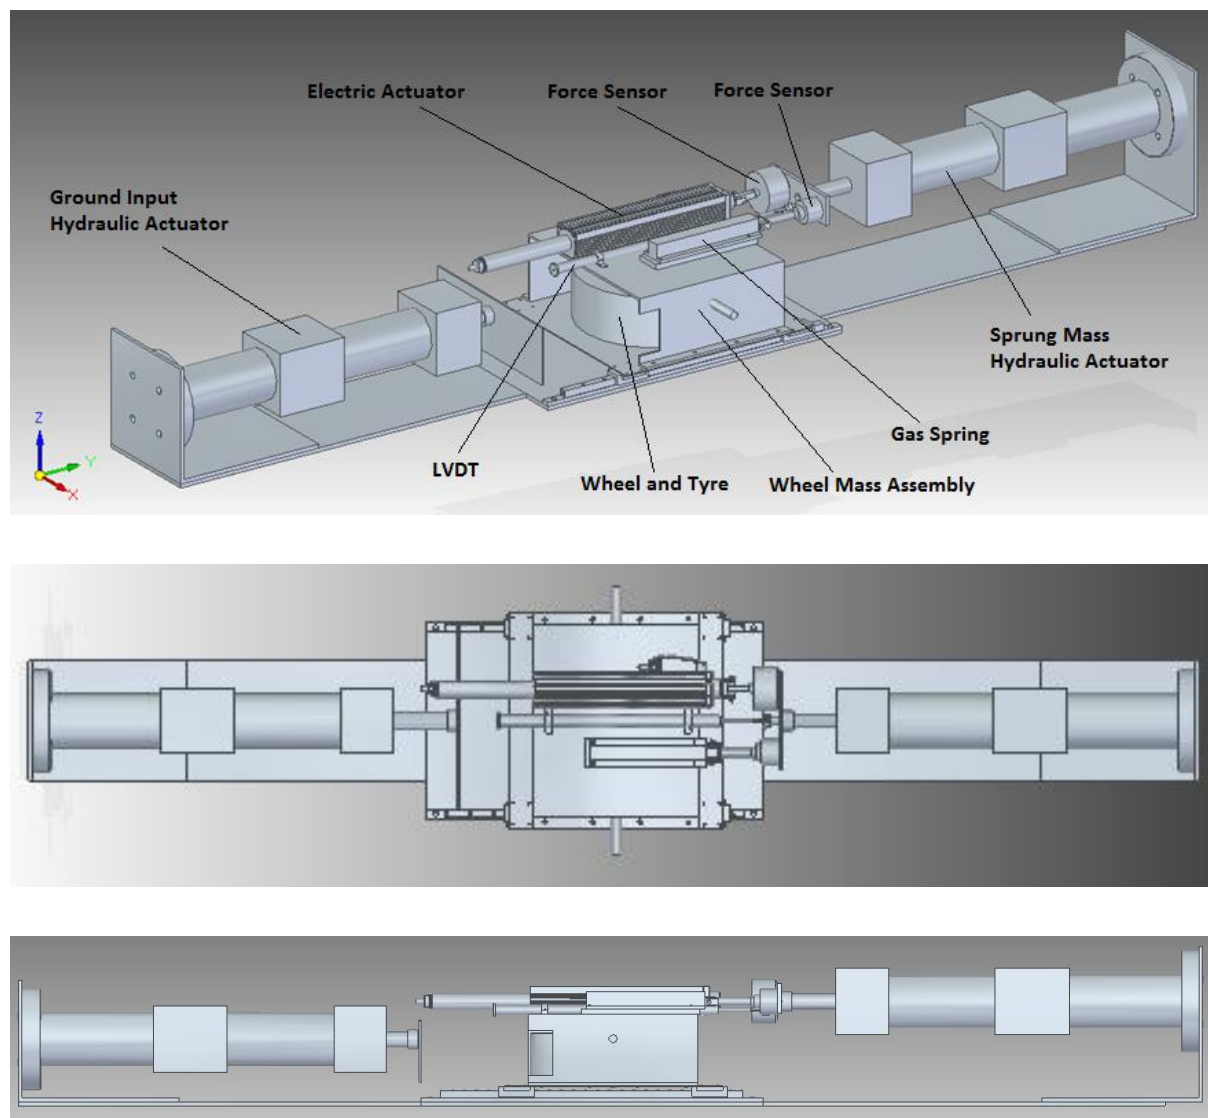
Assembly drawing of horizontal TEST rig. From top to bottom, a) perspective view, b) top view, c) side view
